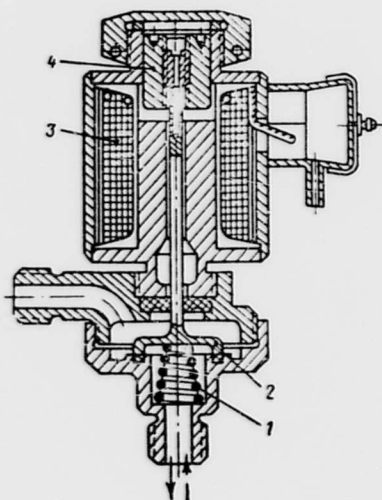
Electromagnetic valve: 1 - spring; 2 - valve; 3 - electromagnet; 4 - core.
